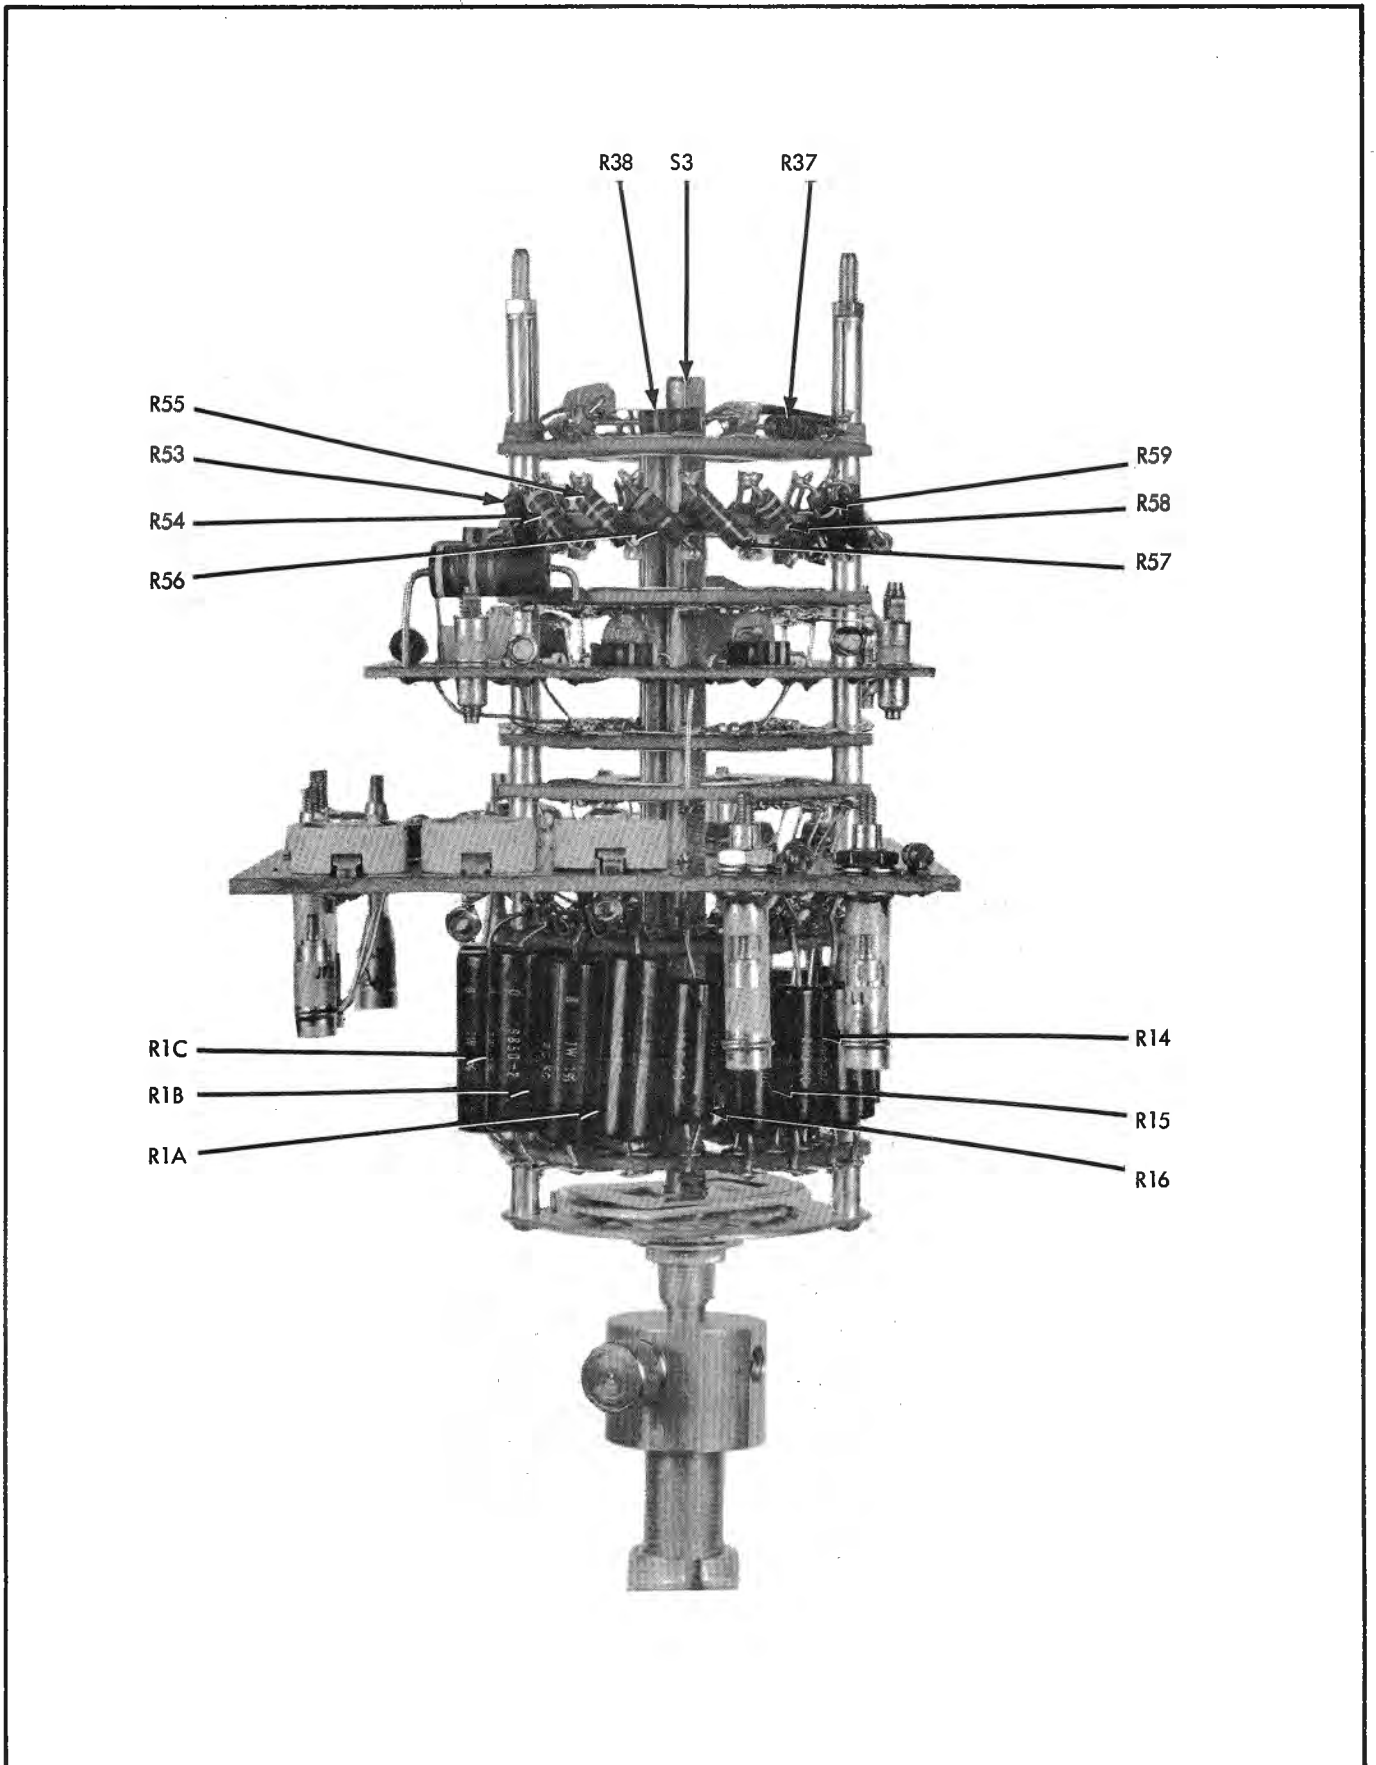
C. RANGE SWITCH DECK ASSEMBLY (Sheet 2 of 2)
